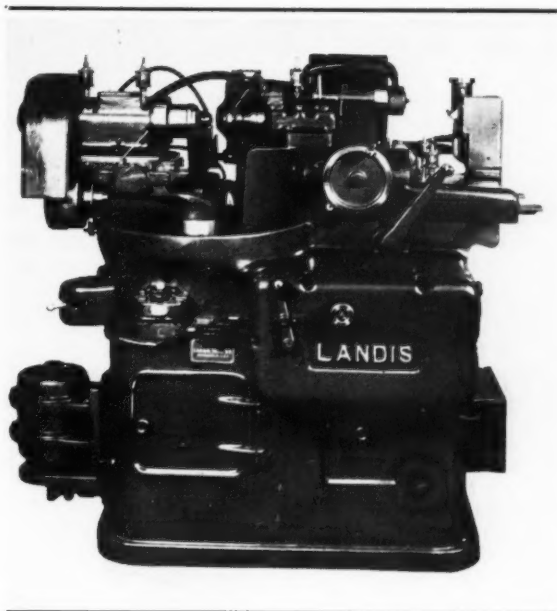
Landis Machine for Grinding the External Races of Anti-friction Bearings
